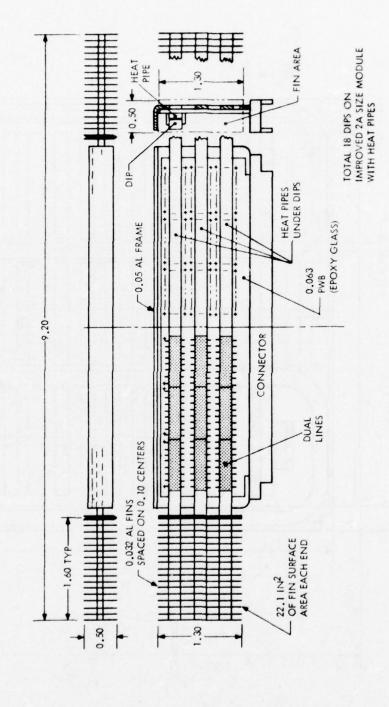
Improved 2A Module With Heat Pipes (Case 6)
